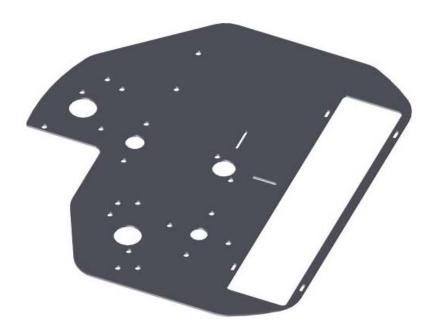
Isometric CAD view of superbracket (overall diameter of 13")
